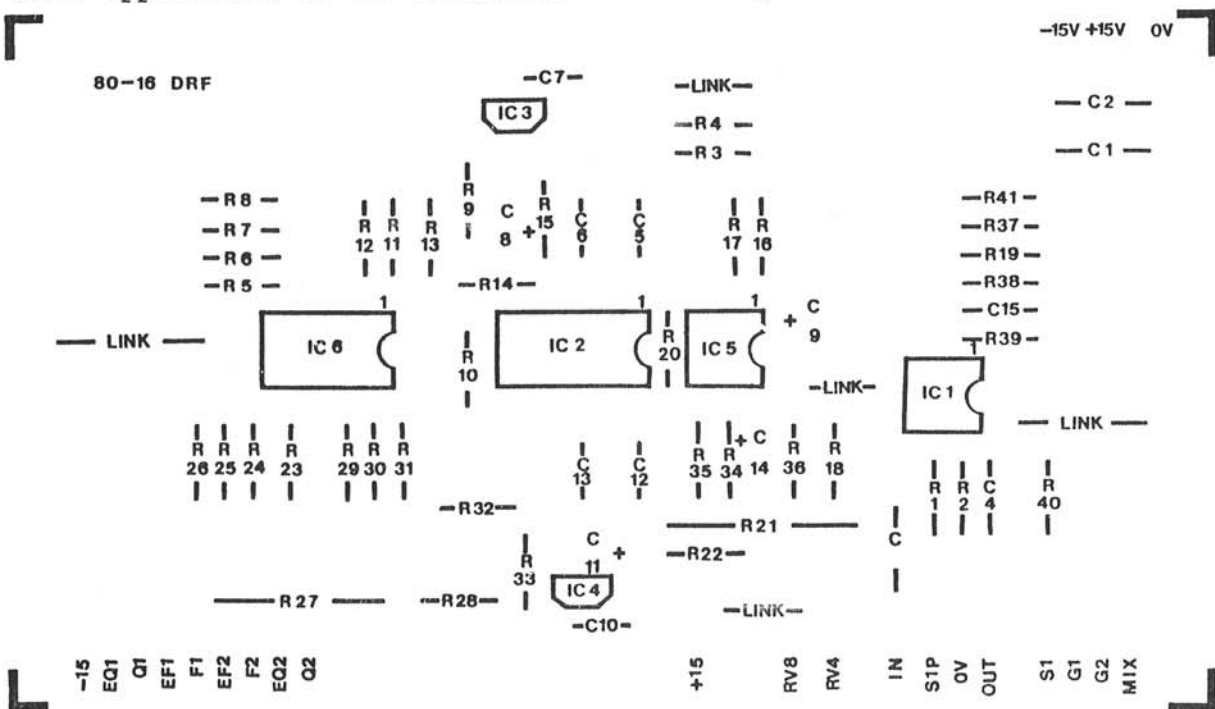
COMPONENT OVERLAY FOR 80-16 PCB
